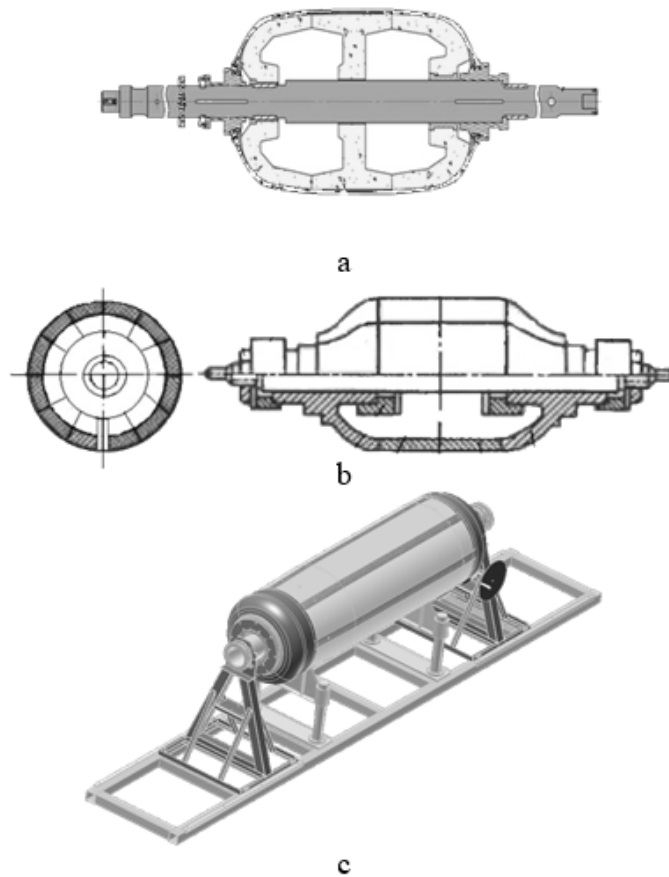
Design options for mandrels: a — sand-polymer equipment; b — collapsible steel equipment; c — collapsible aluminum equipment
